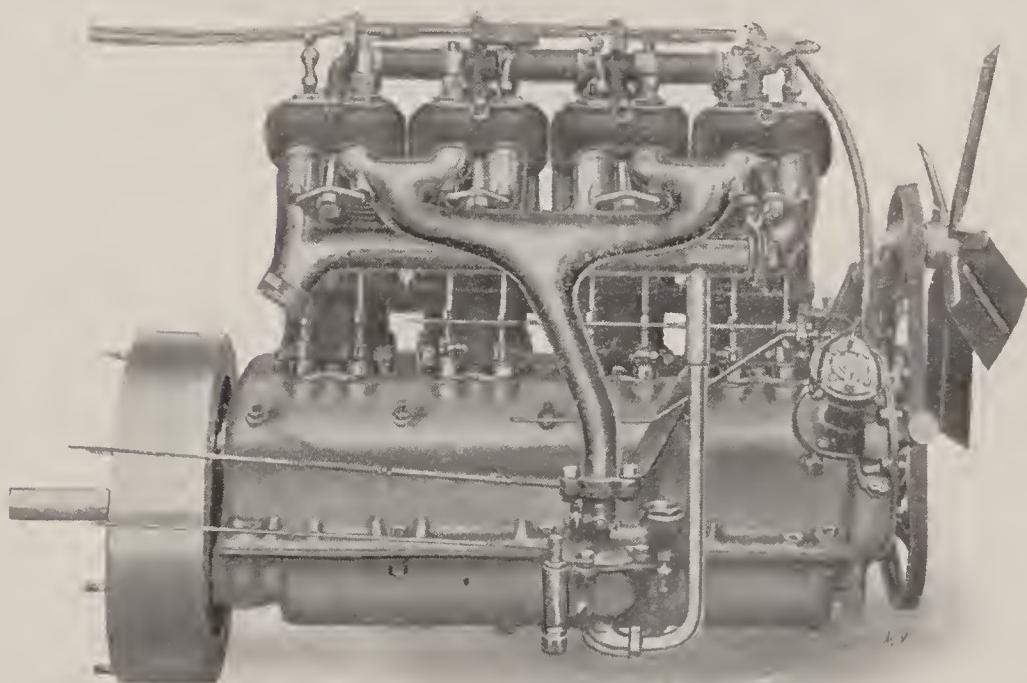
Right Side of the Engine, showing Carburetor, Commutator, etc.
